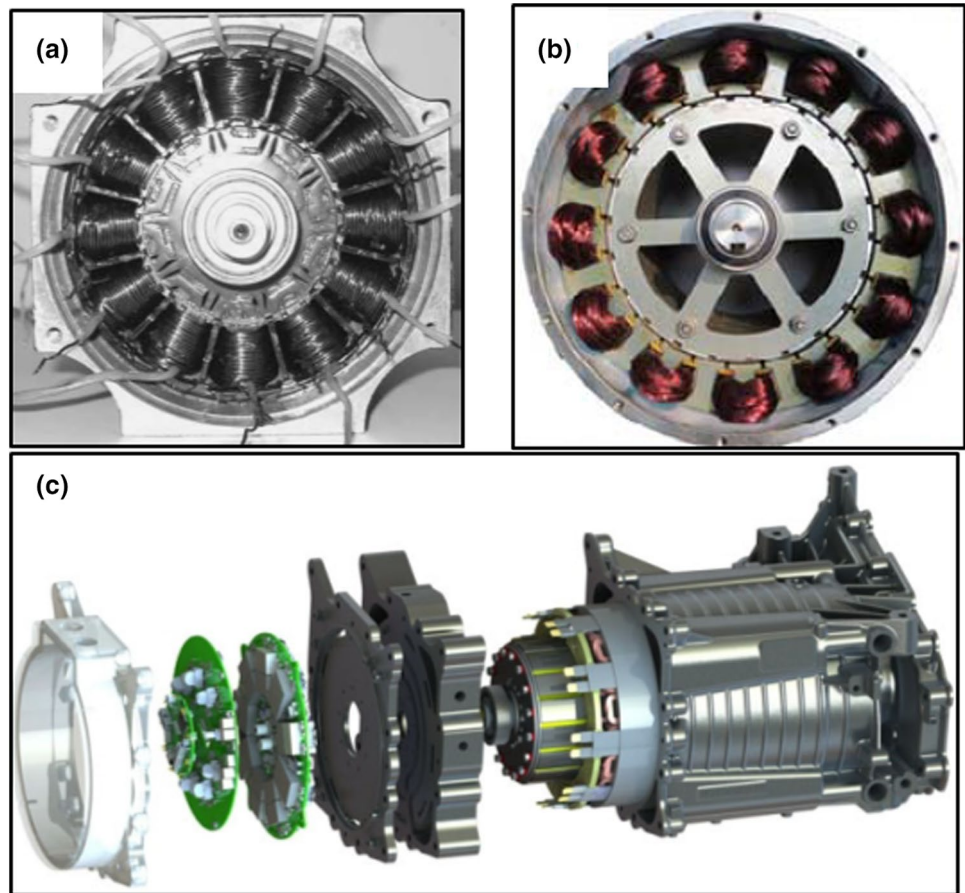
a Six-phase 12T/10P FSCW PM machine [40], b six-phase 24T/22P SPM machine [43], c highly integrated 9-phase drivetrain [44]
